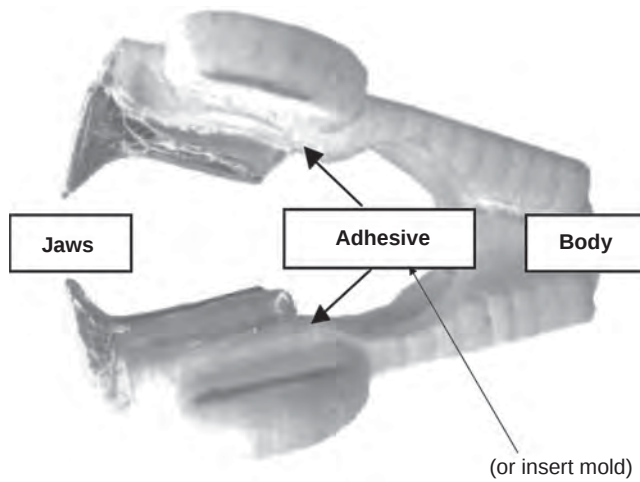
Evolved stapler remover with three parts (insert mold or adhesive jaws w/compliant joint).
